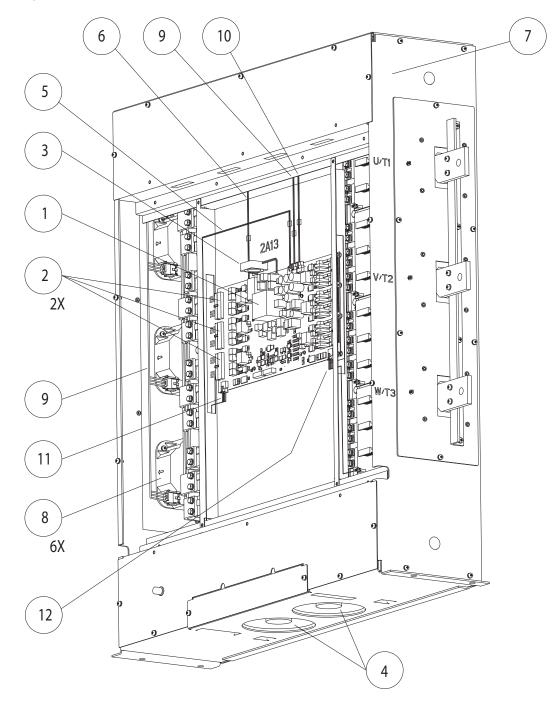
Power module component locations IO and control panel removed: Frame 4 units^(a)
